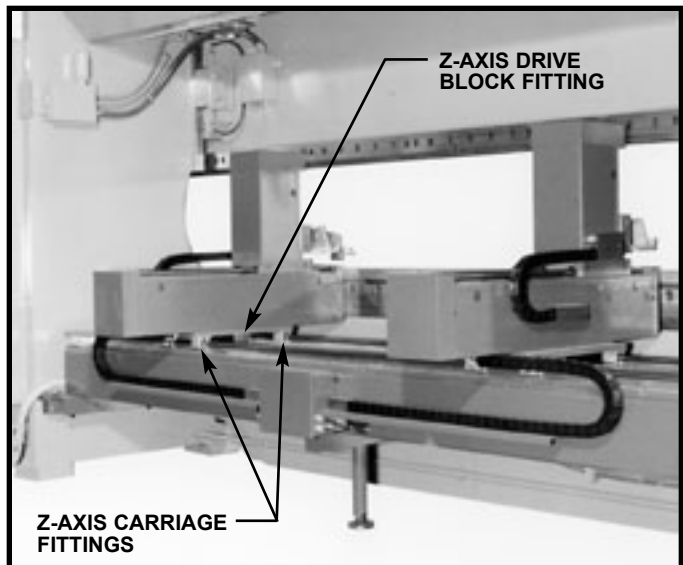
CNC Six-Axis Backgage (Rear view)
